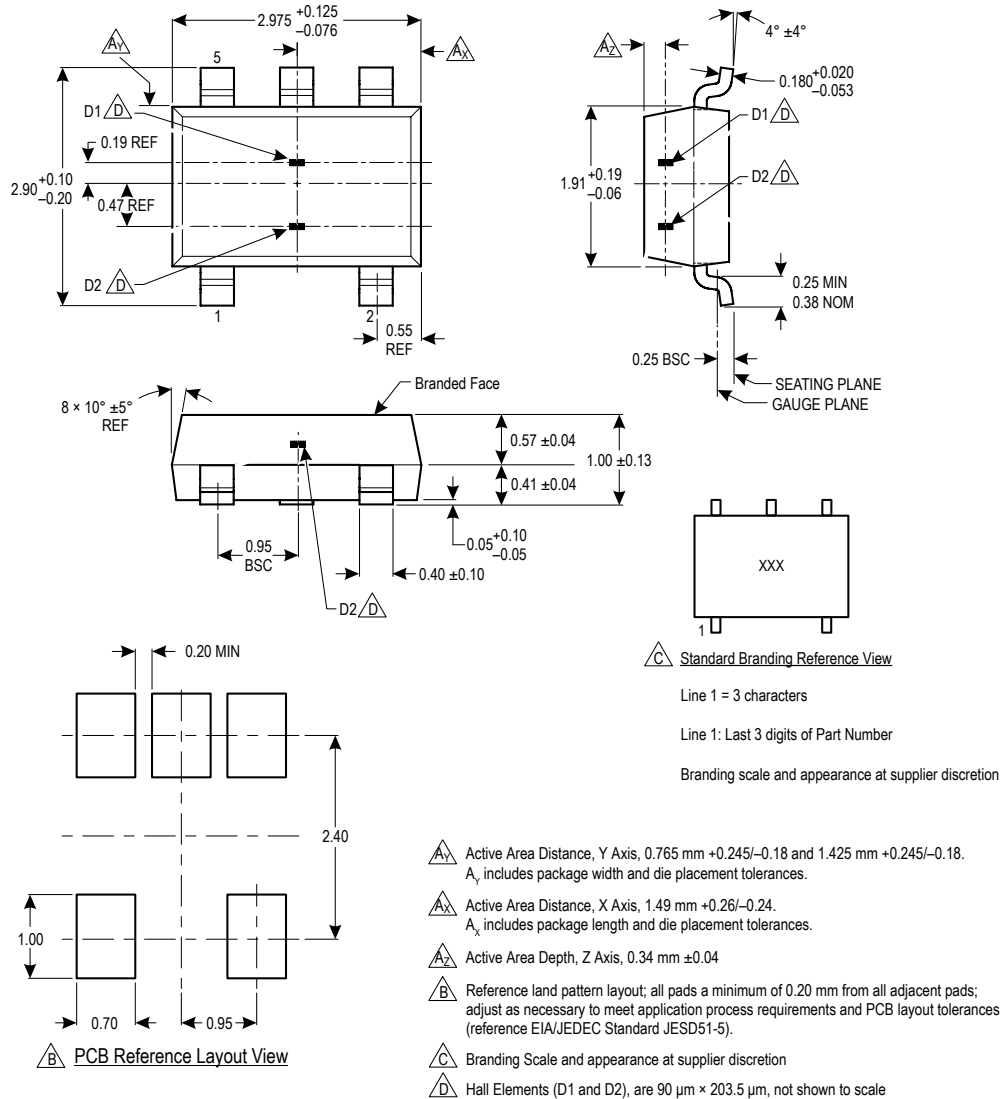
ACS37041 LH 5-Pin SOT23-W Package Drawing
